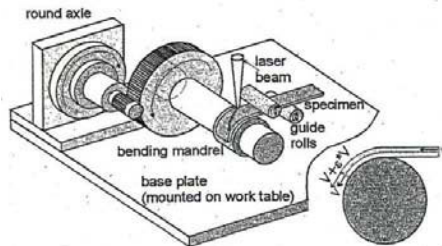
Schematic set-up of test developed for studying stainless steel laser welds [154].
